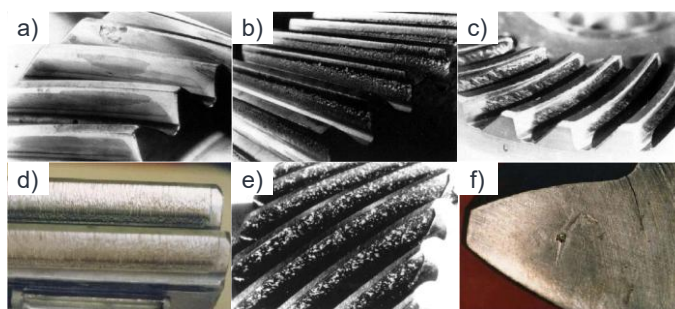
Main wear and failure modes; (a) micropitting; (b) pitting; (c) scuffing; (d) abrasion; (e) corrosion; (f) bending fatigue crack; adapted from [5].
